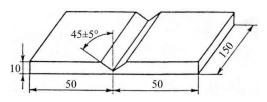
Weld test assembly for the selection of specimens for testing for resistance against the ICC
